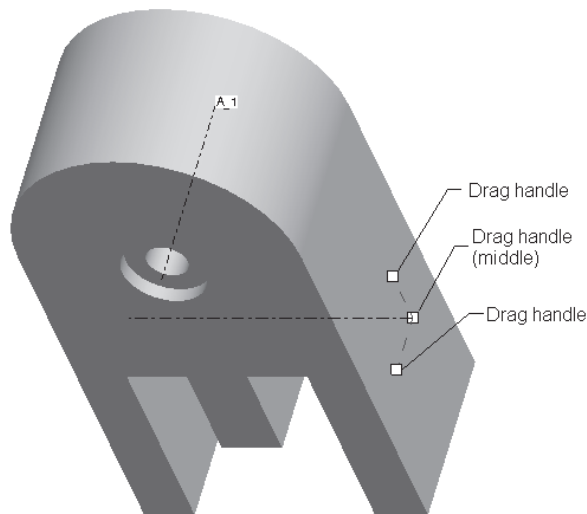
Solid model with the datum axis and three drag handles
